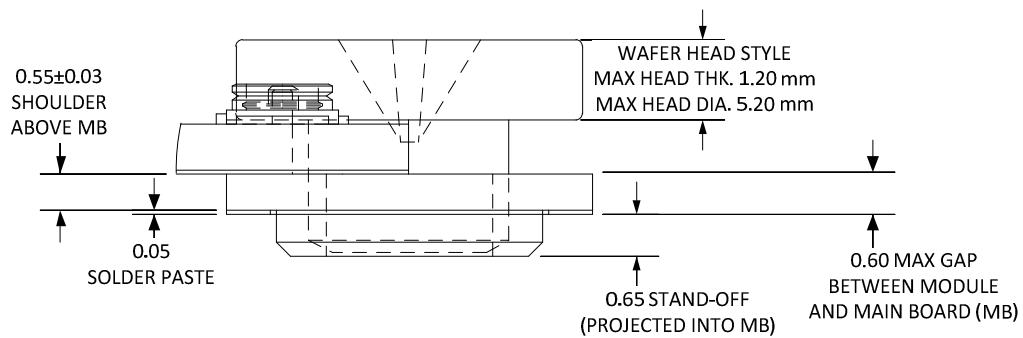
Elevated Single-sided Top Mount Solder Stand-off
